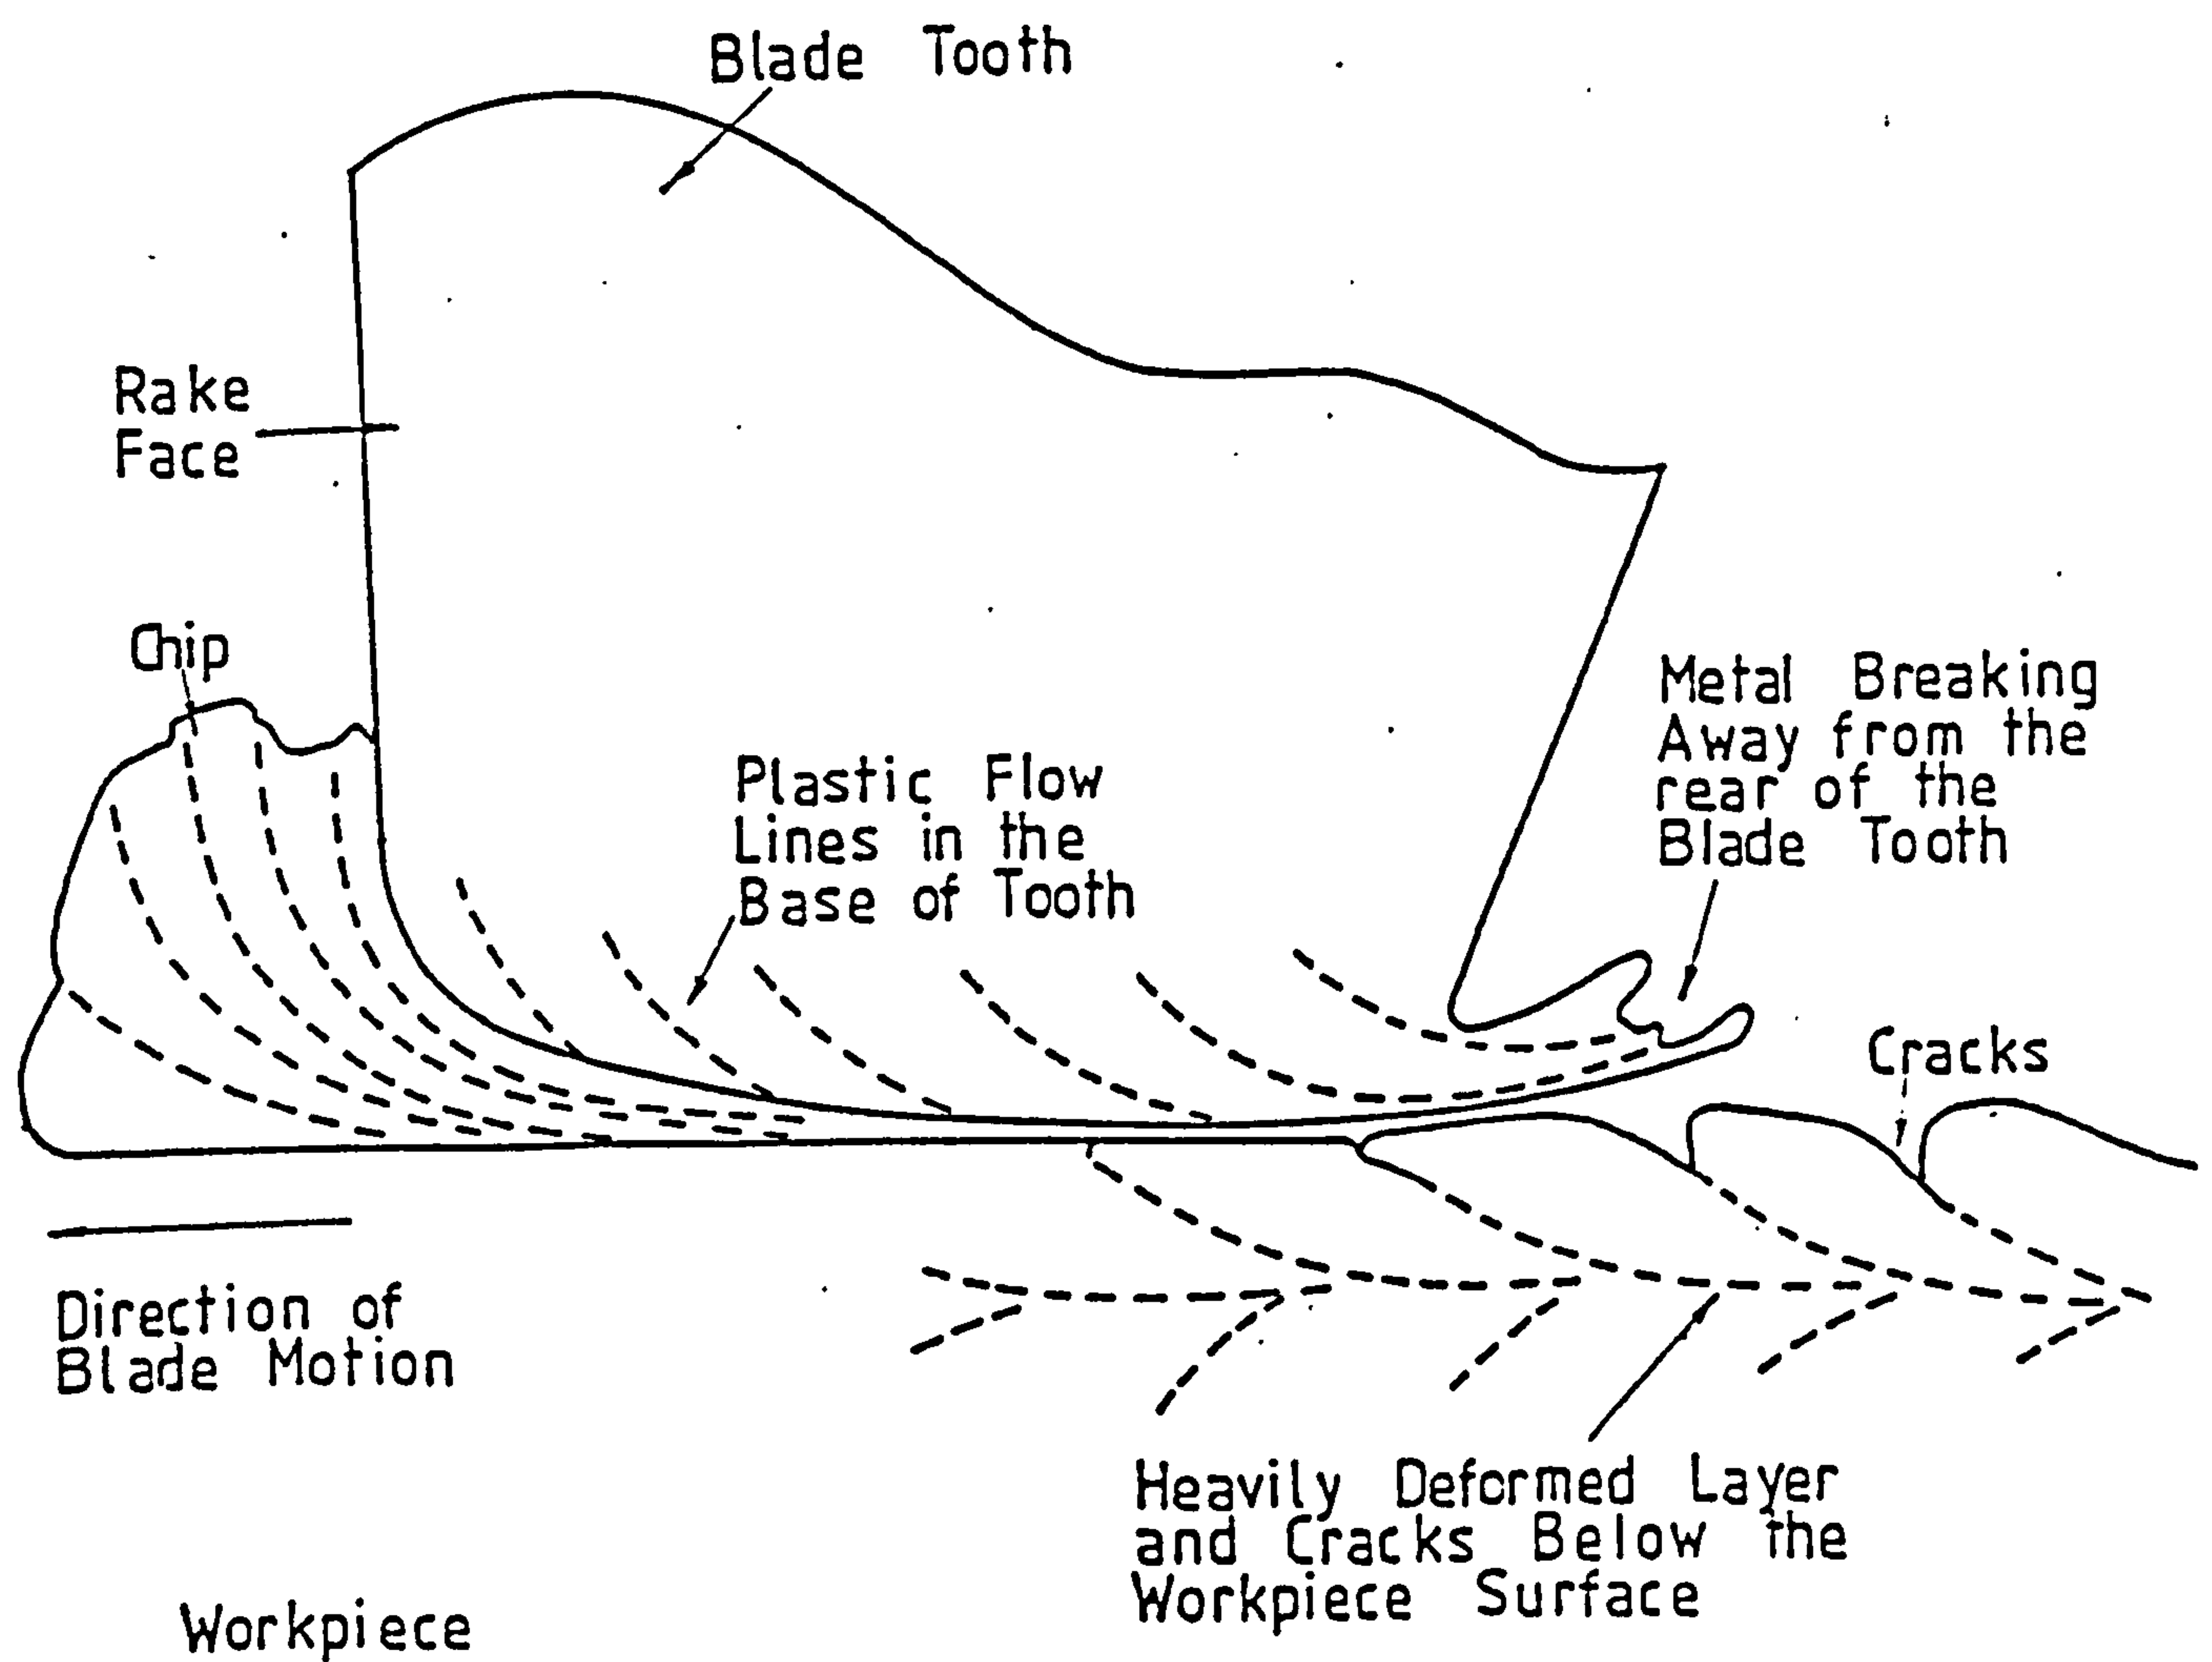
DEFORMATION OCCURRING IN BOTH THE BLADE AND WORKPIECE
